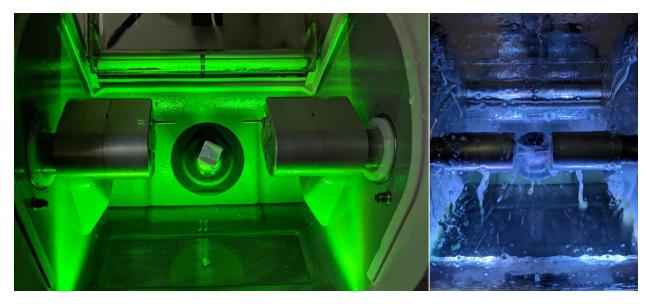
Photographs showing the 3-axis milling machine during drilling sequence.
